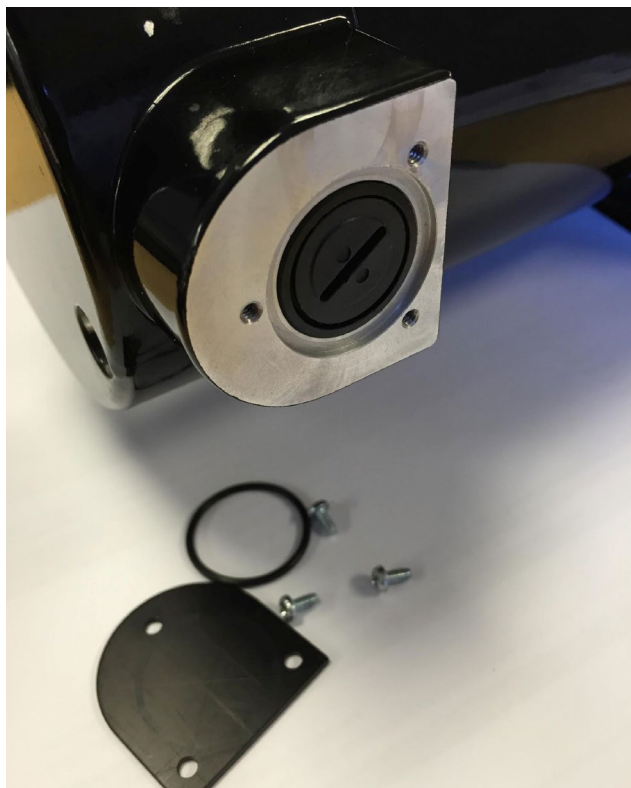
A sealed brush cap cover shown removed from a Brush DC Motor.
